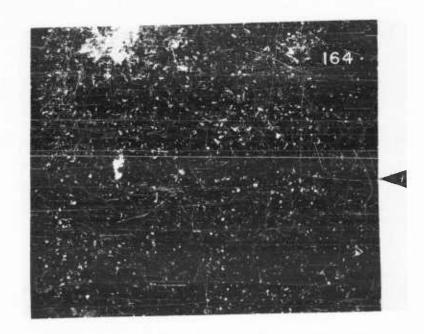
FAILURE IN SPECIMEN NO. 164
